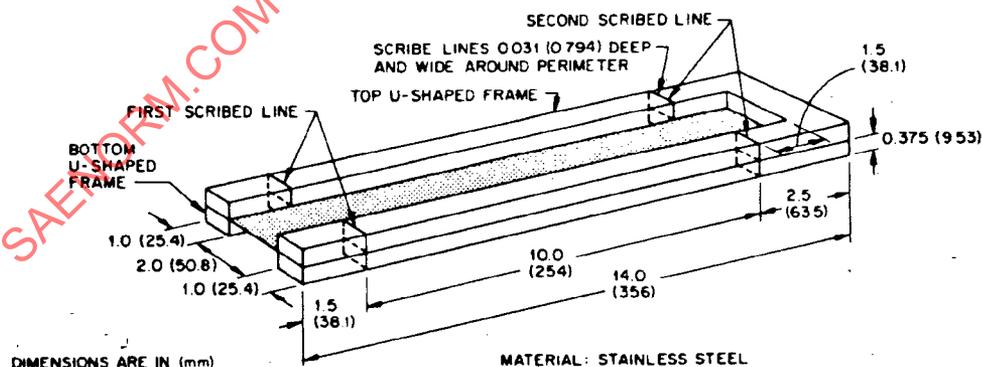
SPECIMEN HOLDER, CONSISTING OF TWO IDENTICAL U-SHAPED FRAMES
